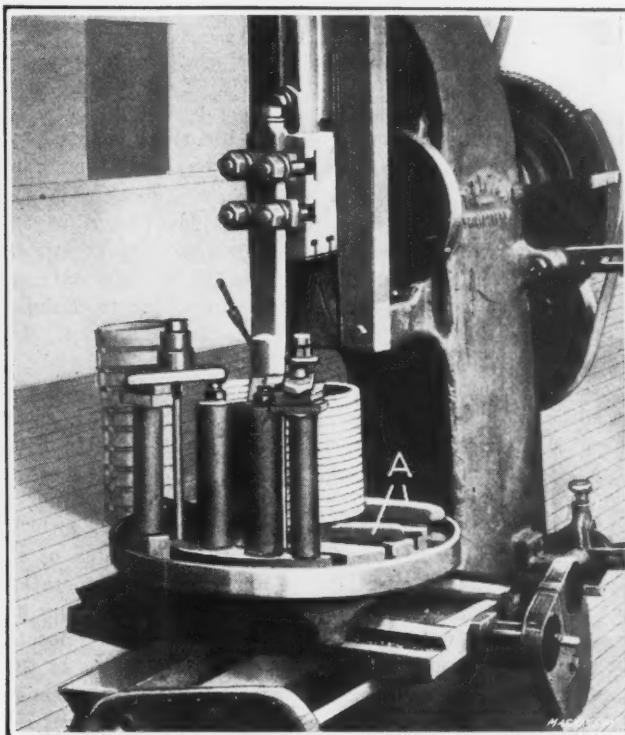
Slotter equipped for splitting Fifteen Piston-rings at a Single Setting
